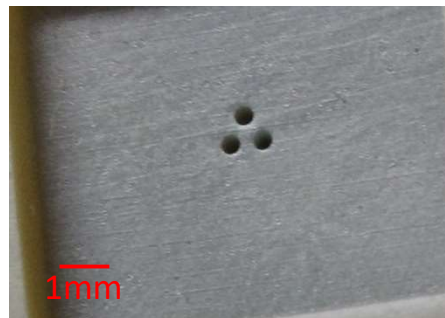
Photo image of 3D Printed Holes. The 3D printed holes with the diameter of  $300\ \mu\text{m}$  and  $600\ \mu\text{m}$  center-to-center distance. The holes have the same diameter for cylindrical and square-shaped microhands. While the depth is  $1.5\ \text{mm}$  for the square-shaped device, it is  $2\ \text{mm}$  for a cylindrical one.
